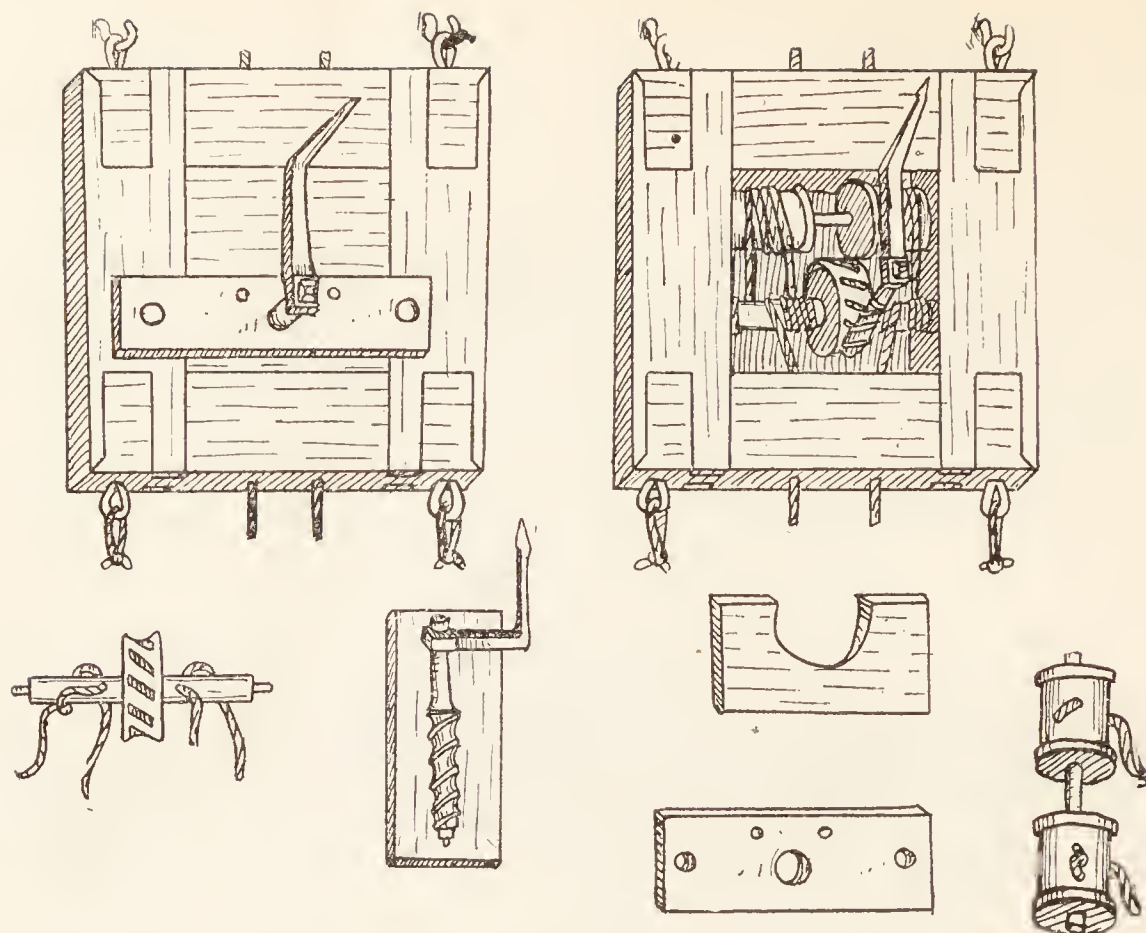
Glossocomum of Nymphodorus. Two views, one showing it closed and ready for use, the other with the lid removed, to show the principle. A crank drives a shaft with a worm thread on it. The threads of the worm engage in notches in a drum. Ropes pass from the axle on which the cogged wheel drum is carried, to drums carried on a second axle. Below are parts of the machine showing its structure and also the method of fixing the rope ends. After Vidius. Power, ONE TURN OF AXLE only moves the cogged wheel one notch—great power therefore varying with length of crank. Power still further increased by lower axle being smaller than drums of upper.
